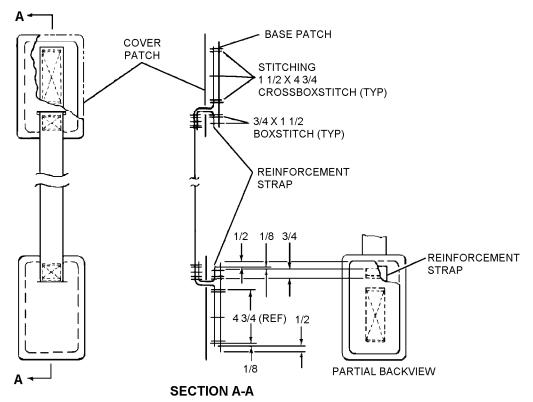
Fabrication of Boarding Stirrup Assembly
